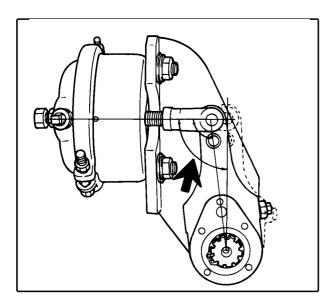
Brake Chamber and Slack Adjuster Adjustment Angles
